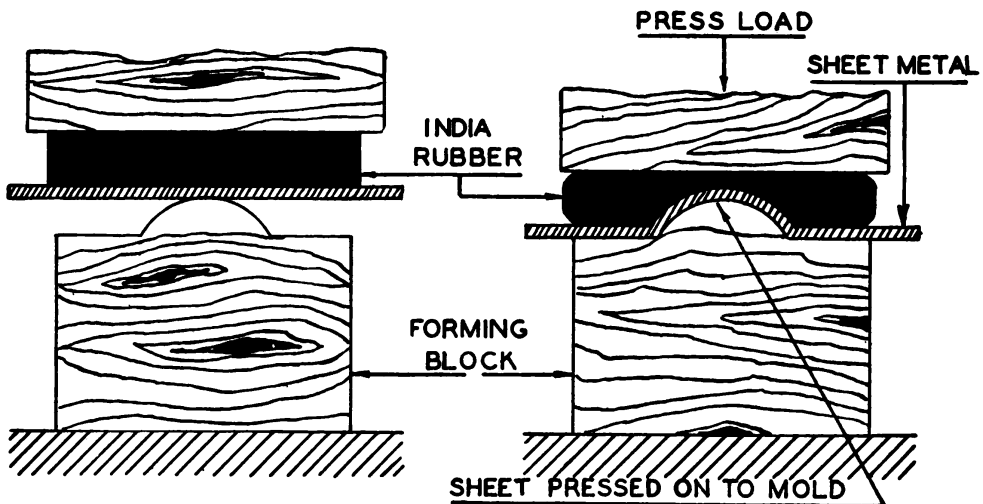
Forming sheet metal by means of male die and heavy rubber blanket.
